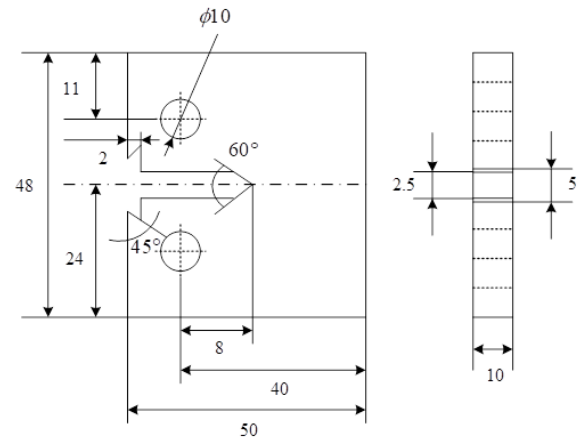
CT test dimensions for the fatigue crack extension test
